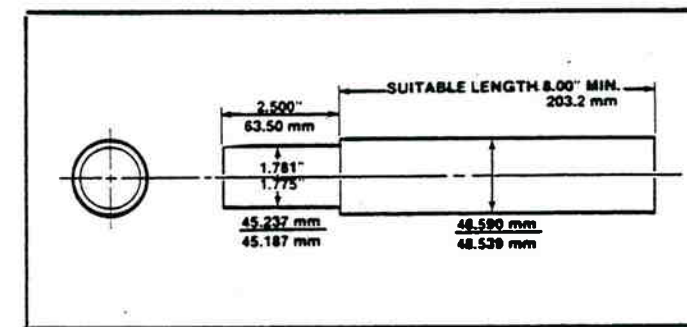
Tool - King Pin Bushing Removal & Installation.
